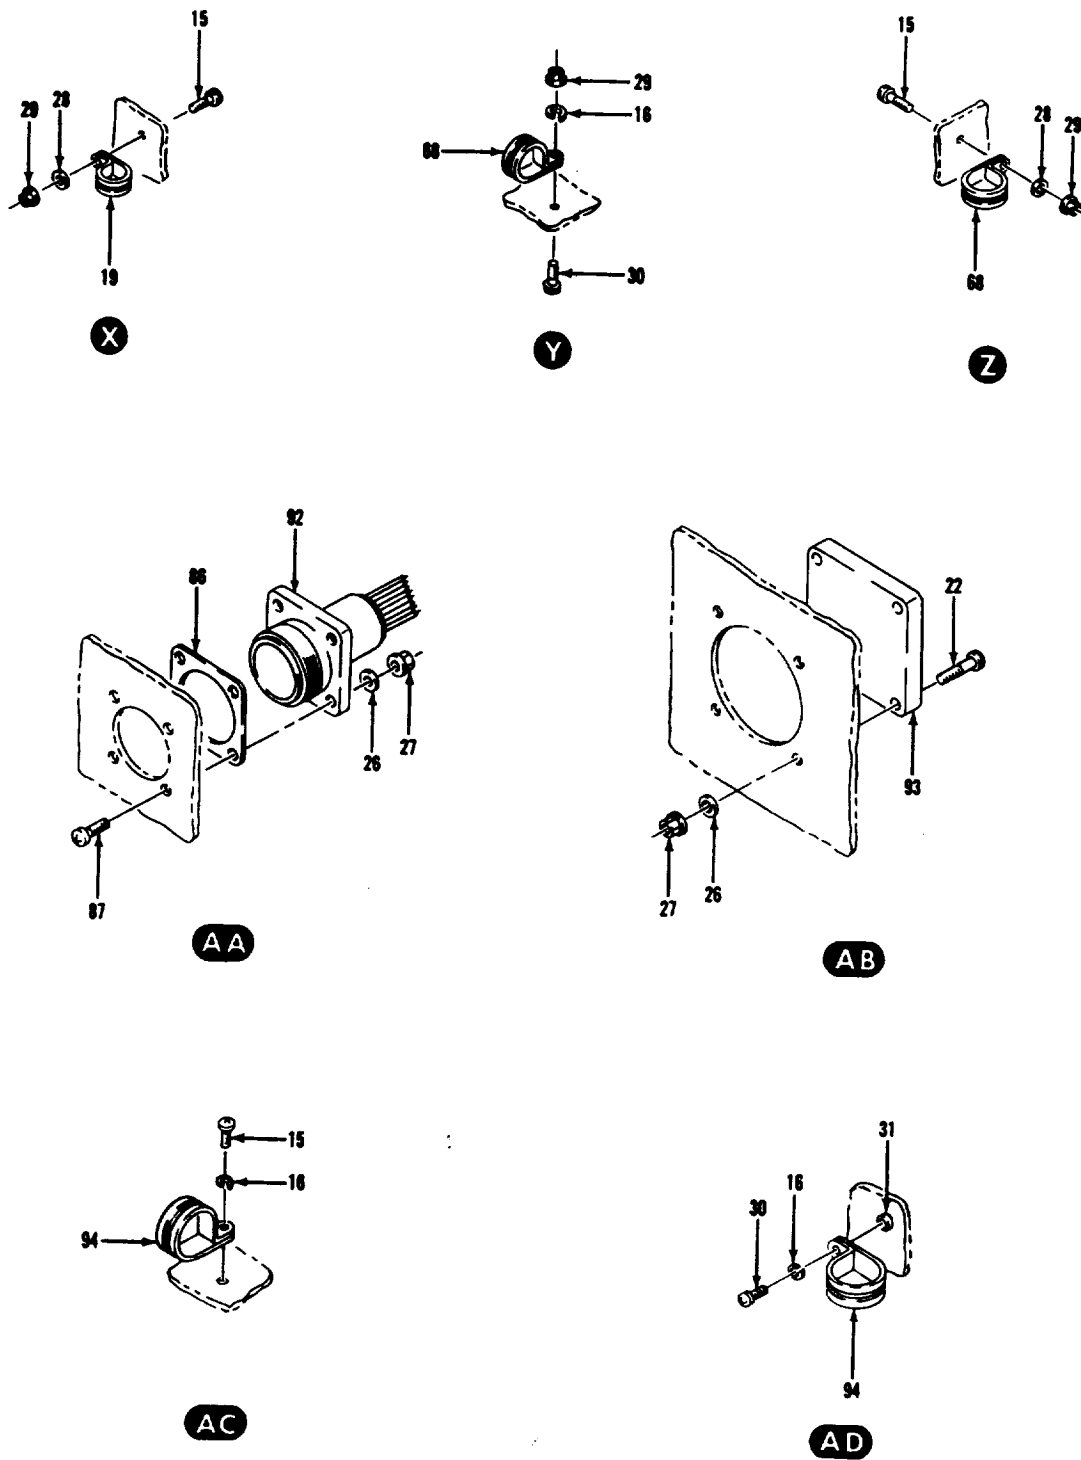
Electrical Equipment Installation (Sheet 9 of 19)
